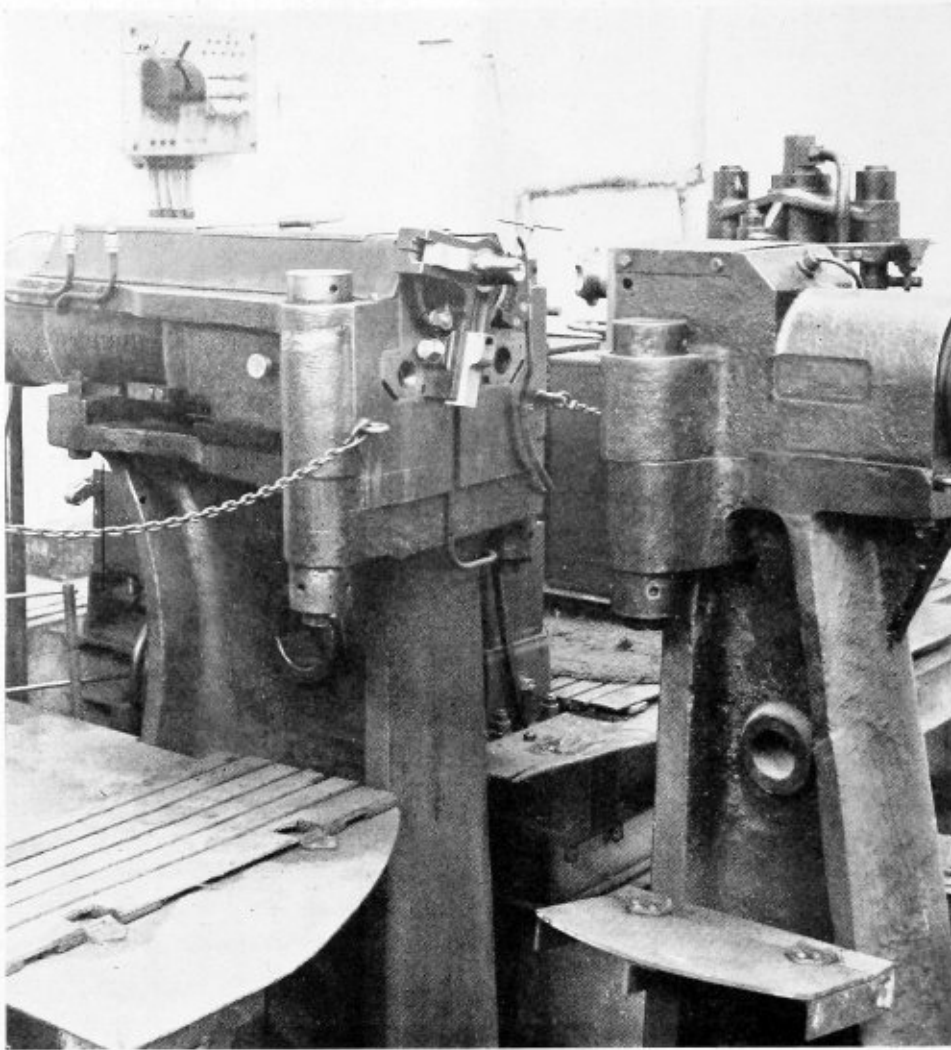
Rotary head with centering pin ready for riveting oblique seams, mounted on pressure head of hydraulic riveter. Pin riveting device is on holding-on tool
